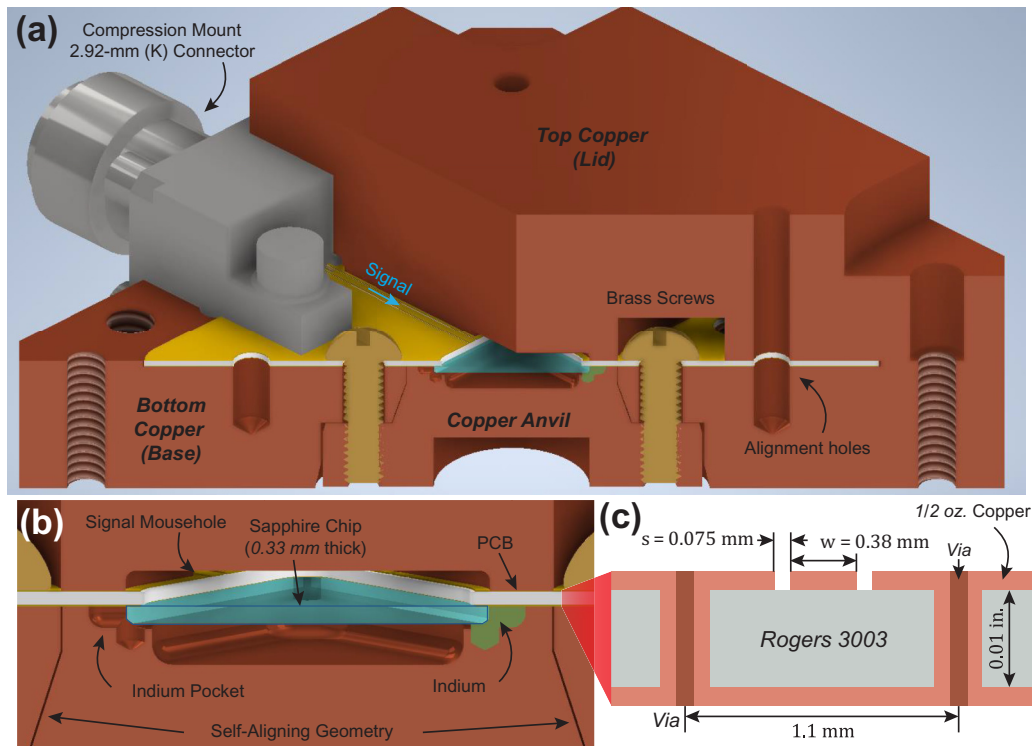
(a) Cutaway renderings of the K-band packaging, highlighting the three machined copper pieces that secure, thermalize, and electrically shield devices patterned on the sapphire chip (blue). (b) A close-up view shows how the sapphire chip is held in the anvil piece with sections of indium wire: as the anvil is screwed into the base, the anvil geometry aligns the chip within a tolerance of 0.005 in. and the indium wire (green) deforms into the machined pocket, firmly securing the sapphire. (c) The package also routes a signal from K connectors to and from on-chip devices. This is accomplished with a circuit board fabricated using a low dielectric constant substrate with good high-frequency loss properties. Plated vias on either side of the signal trace combined with a mousehole slot in the copper lid ensure that the signal is confined without excessive leakage and unwanted resonances.
